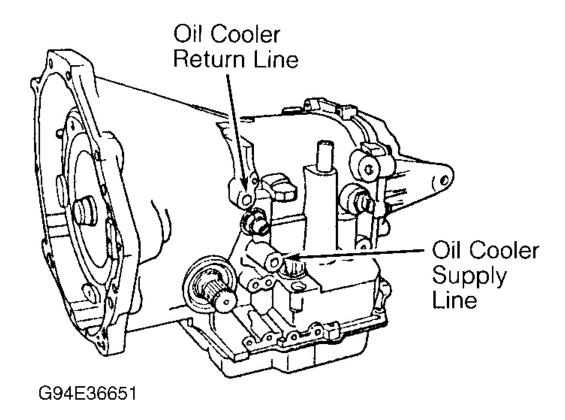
Identifying Oil Cooler Lines Courtesy of CHRYSLER LLC
